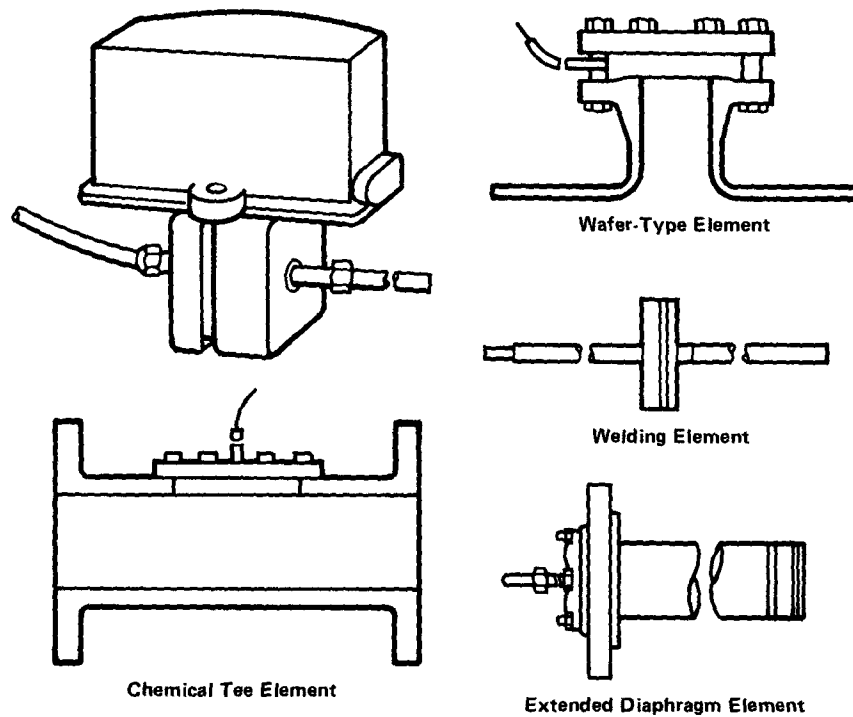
REMOTE SEALS FOR USE WITH A DIFFERENTIAL PRESSURE TRANSMITTER
